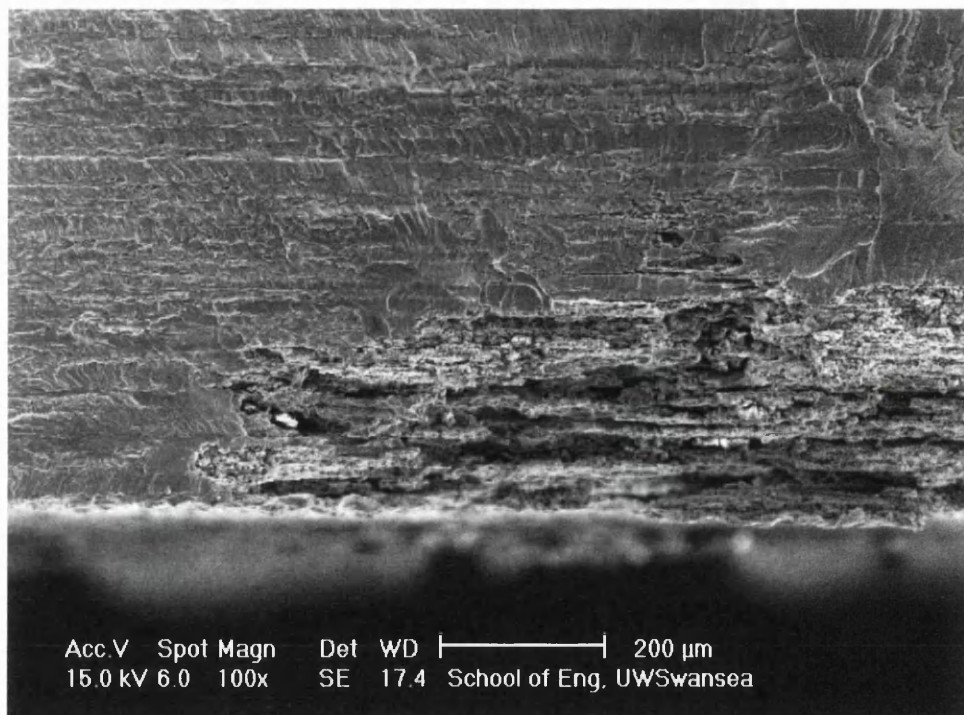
Fracture surface of specimen PC-21, including crack profile dimensions.
